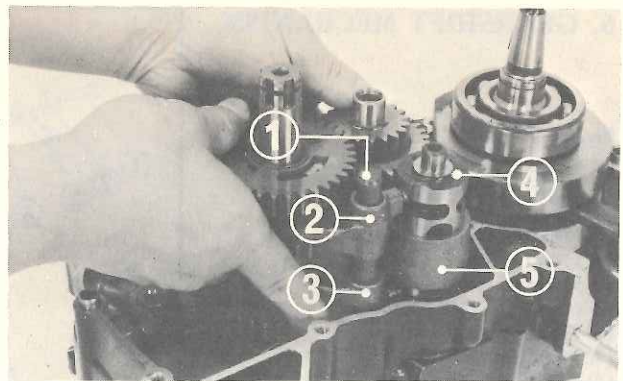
(1) Gearshift fork shaft (4) Gearshift drum
